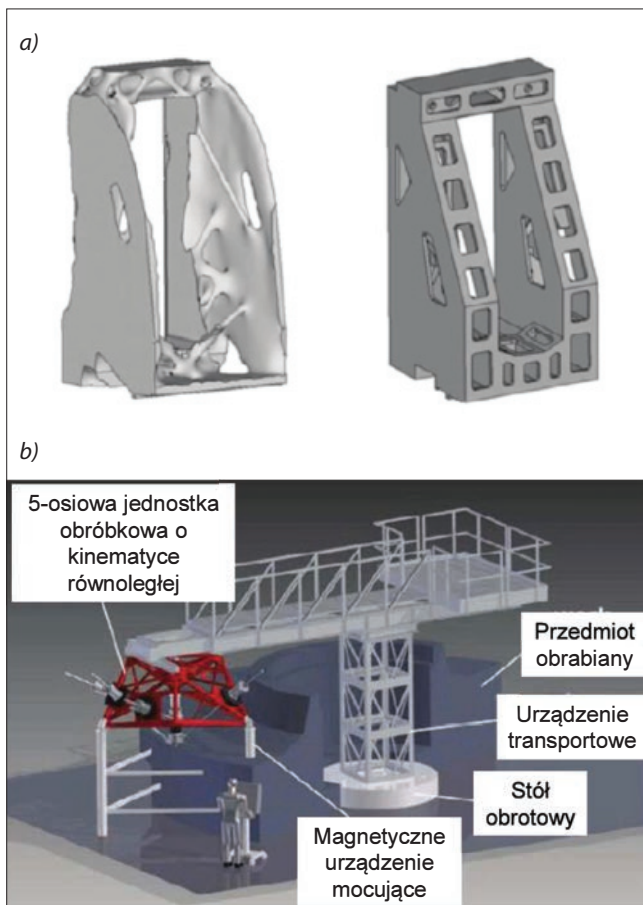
Examples of application of biologicalisation in machine tool design: a) topological optimization of a machine stand (left) and its technical representation (right), b) modular mobile 5-axis parallel kinematic machine tool [6]
